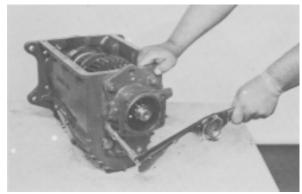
Tighten bearing cap stud nuts 35 -45 Ft. Lbs. Torque [47,5 - 61,0 N.m].
